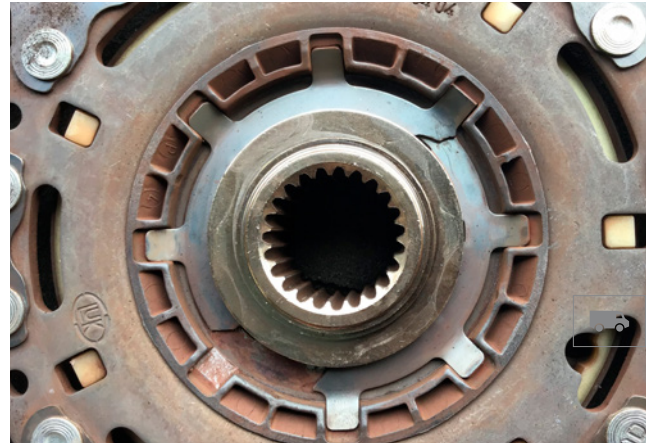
Wear of the clutch disc splines and broken ring shaped leaf spring
